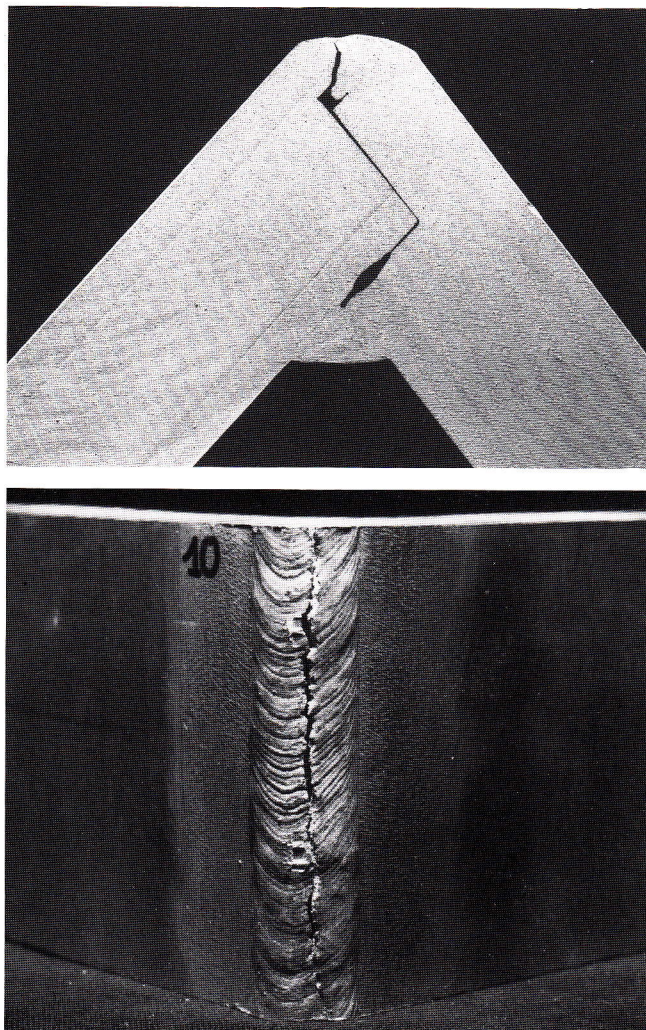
Details of a welded joint subjected to S.C. test; propagation of premature fracture by S.C. is not observed adjacent to the weld bead; the joint has been subjected to overloading during tests, and the fracture has propagated along the direction of maximum gradient of stress concentration. a) cross section; b) external surface of the joint.
